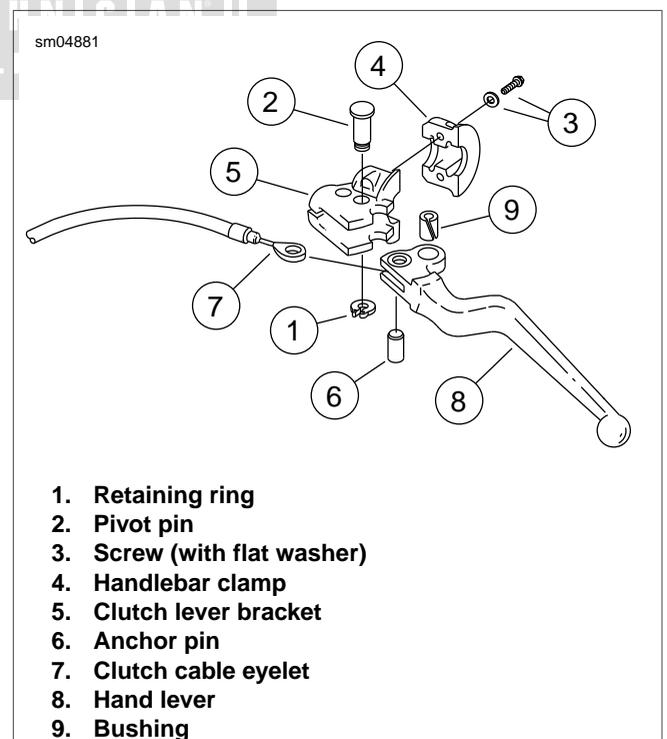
Disconnect Clutch Cable From Hand Lever
